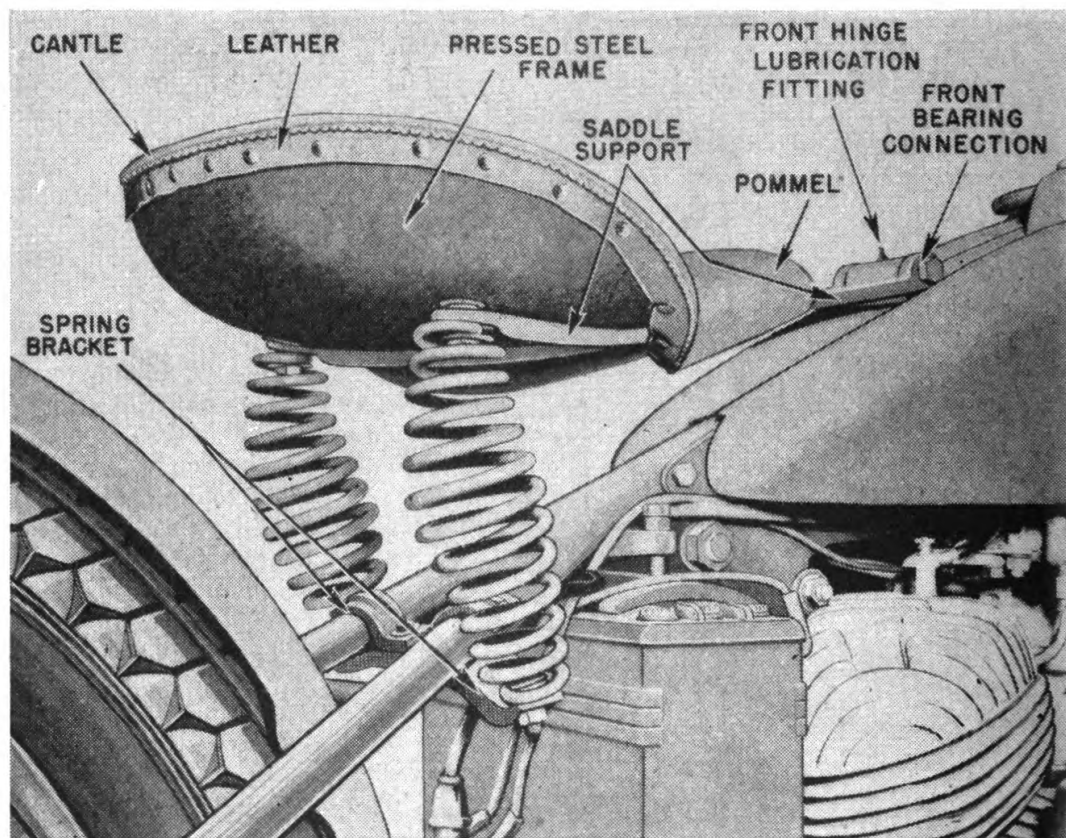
Motorcycle saddle mounted on two coil springs.
